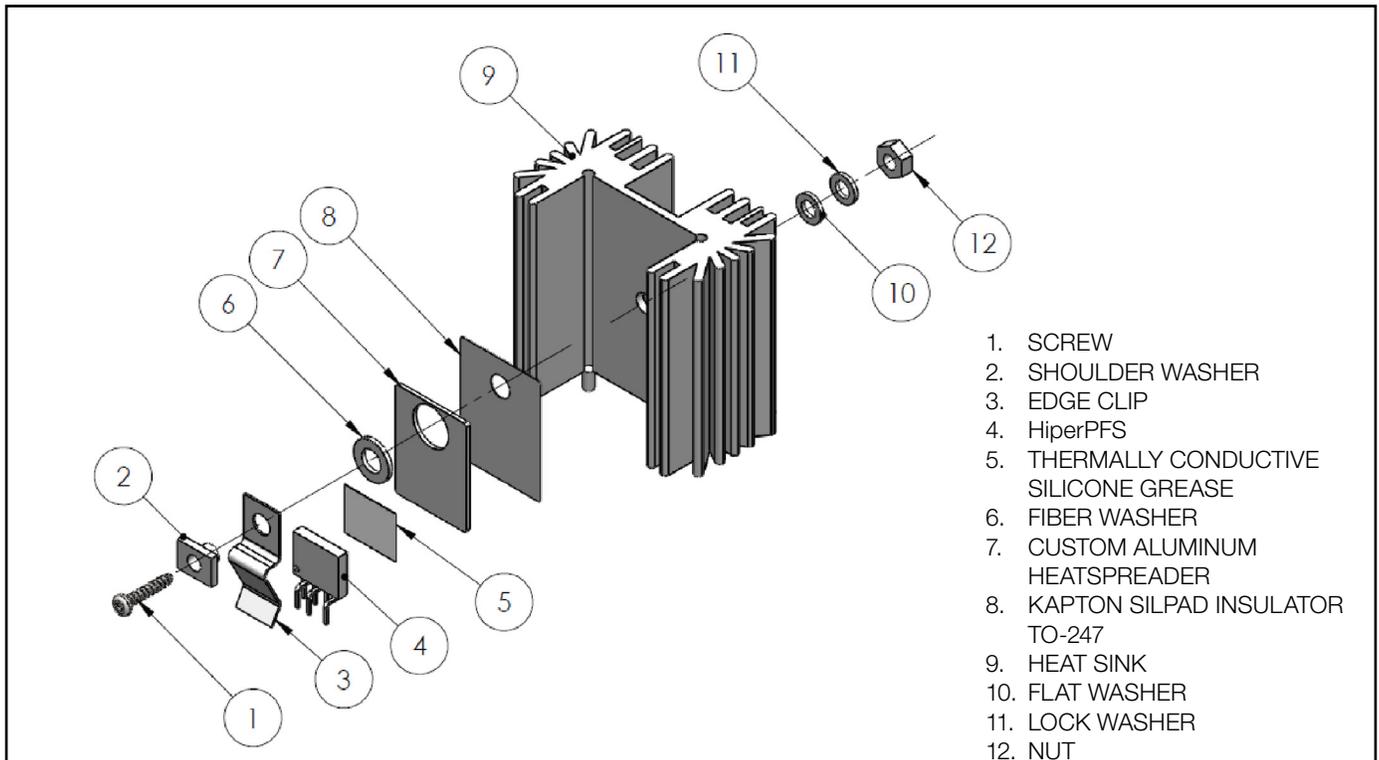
Heat Sink Assembly Example for Designs >150 W (Universal Input) and >300 W (230 V Input).
